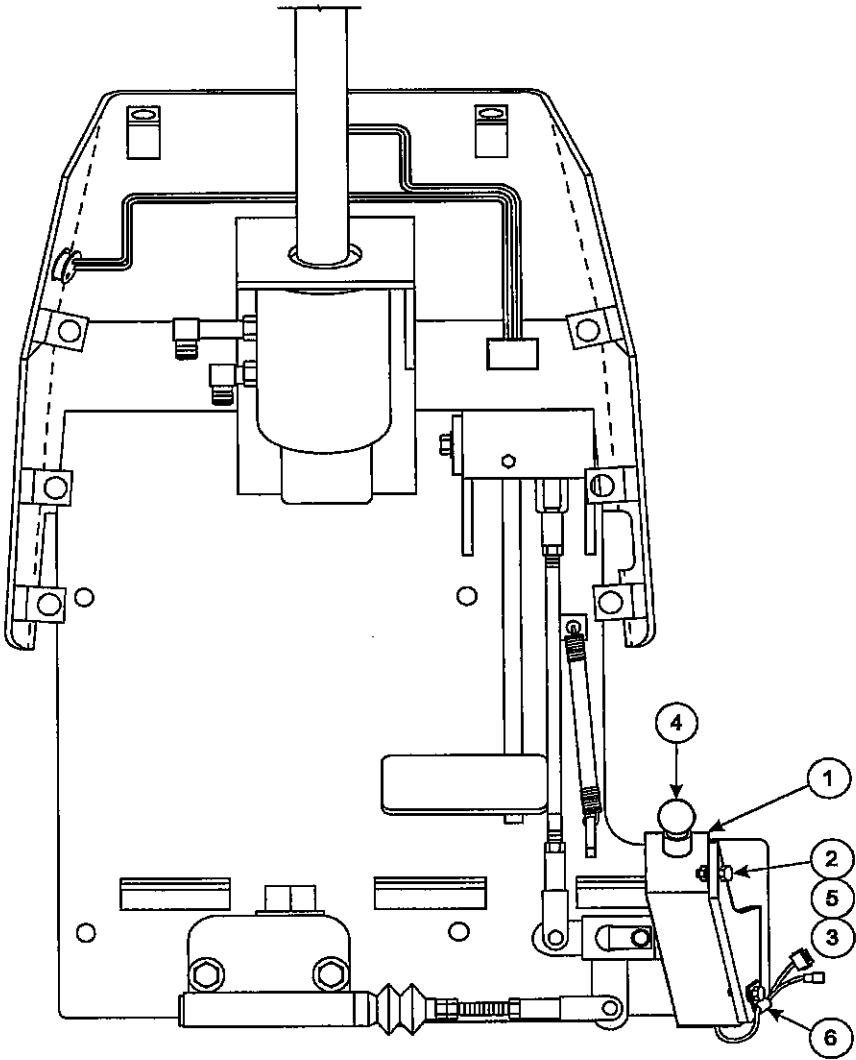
Steering Column Assembly, p/n: 1400968-D
